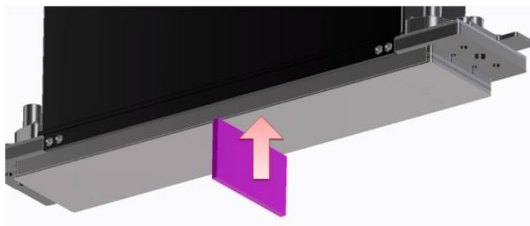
Shock test for metal nozzle plate utilizing a printhead wiper
